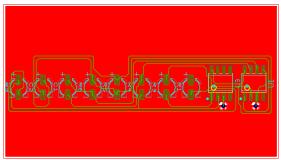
PCB design of biquad filter with two op-amp IC using Ultiboard
